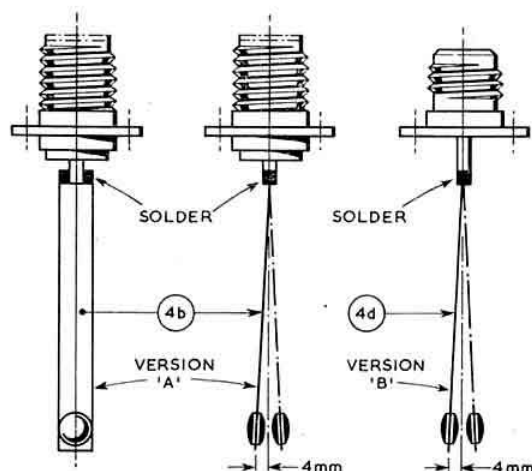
The switch strip can be soldered direct into the centre conductor of either the A or B version sockets (4).
